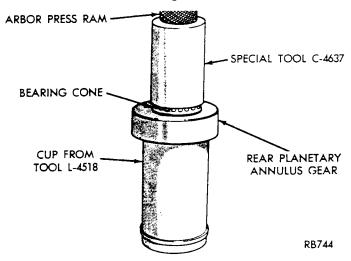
Install Rear Planetary Annulus Gear Bearing Cone
